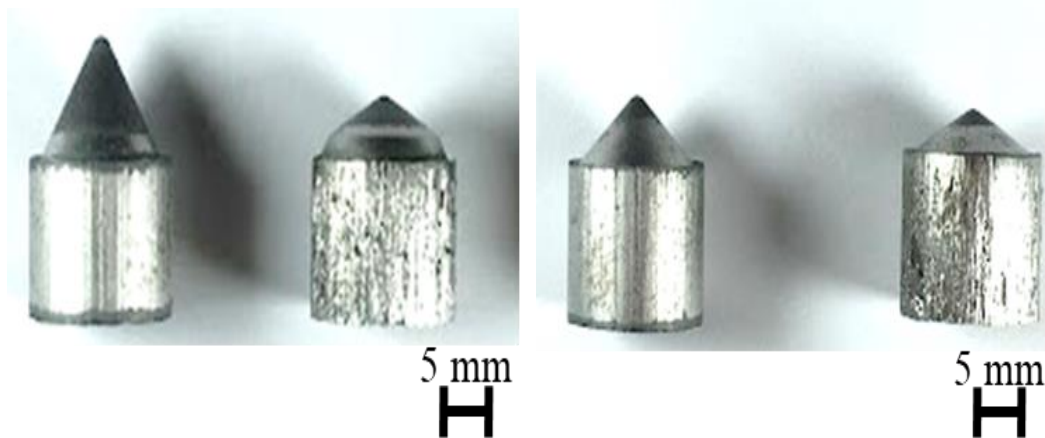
Shapes before and after cold forging. (a) before forging. Tip angle: 90 degree, (b) after forging. Tip angle: 60 degree.
